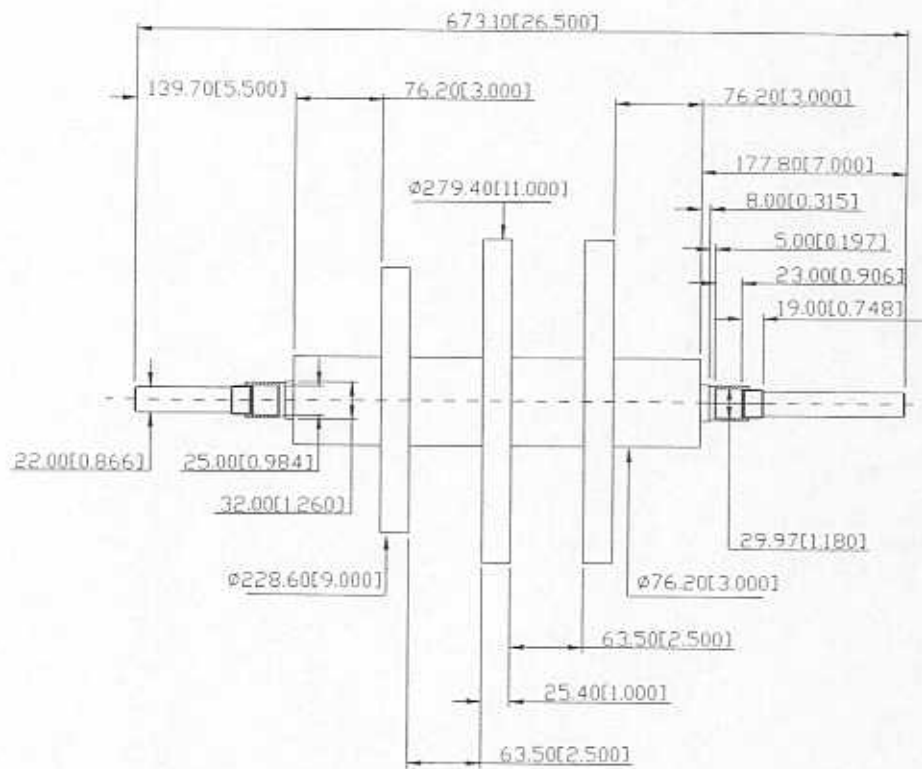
Geometry of three-disk rotor (mass 41.7 kg, 91.8 lb). Test rig shown in Figure 1.
